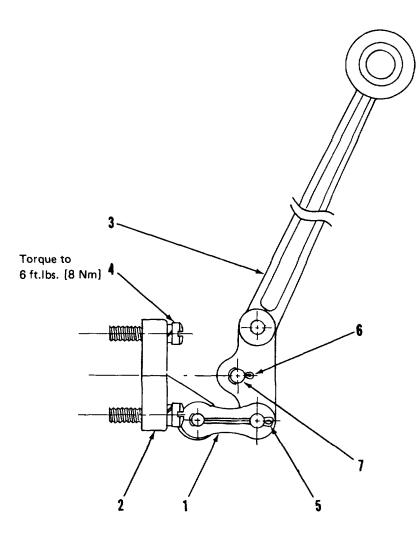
OPTIONAL VERTICAL HANDLE AND BRACKET ASSEMBLY
